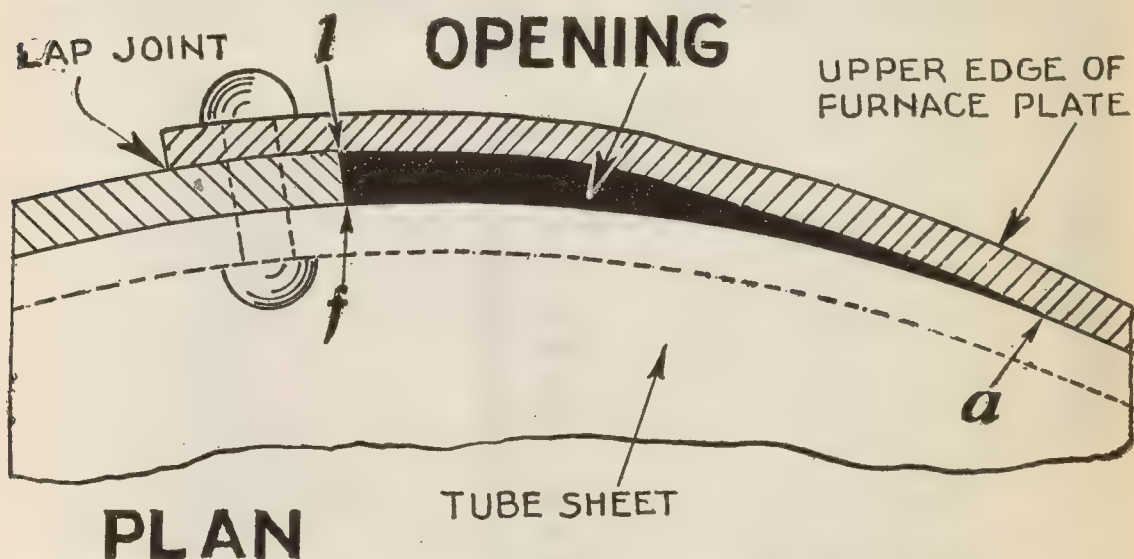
,748.—Detail of lap joint showing shape of the opening due to the lap.
